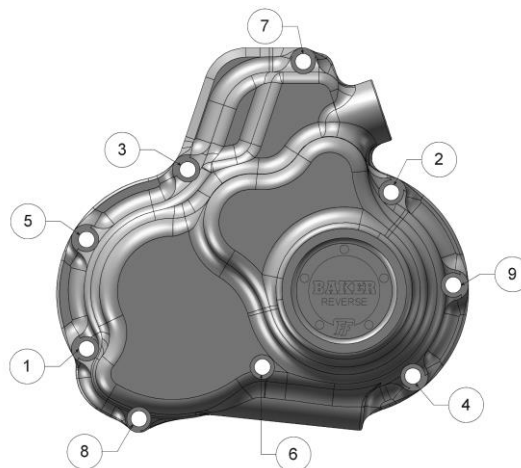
| TORQUE SEQUENCE FOR FRONT OR REAR FEED CABLE STYLE COVER
